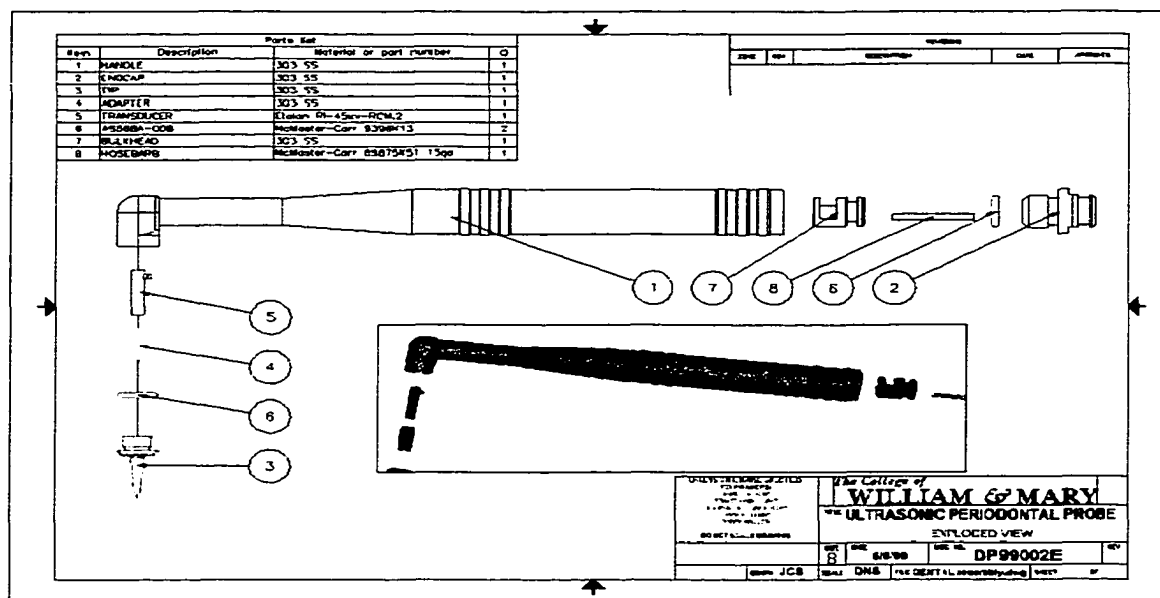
Design drawings for the prototype ultrasonographic periodontal probe.
